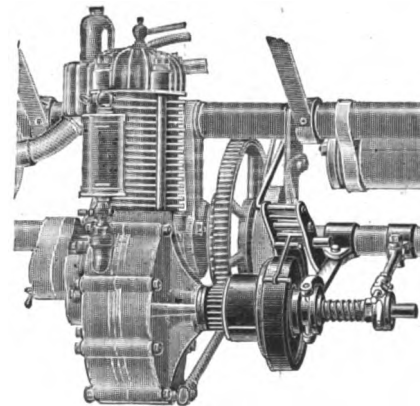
THE "DUPONT" GEAR WITH FRICTION CLUTCH.
